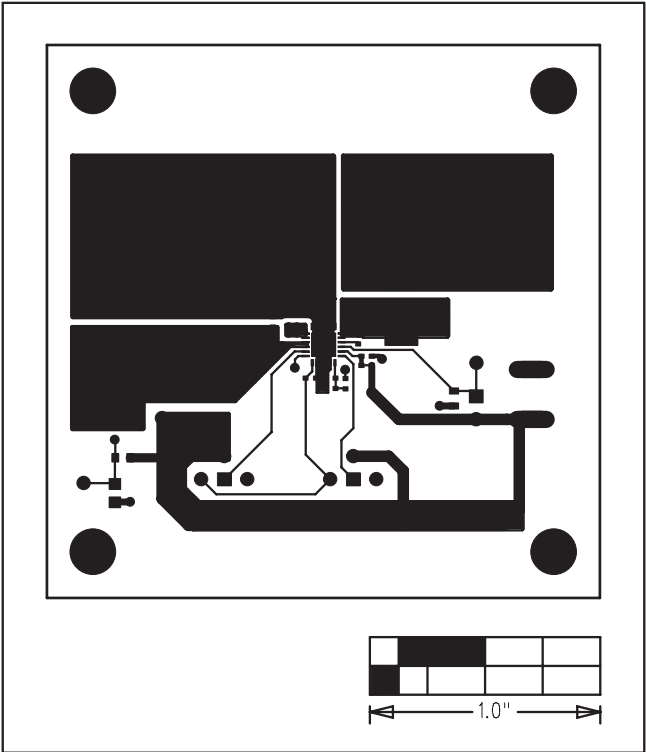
MAX17083 EV Kit PCB Layout—Component Side
